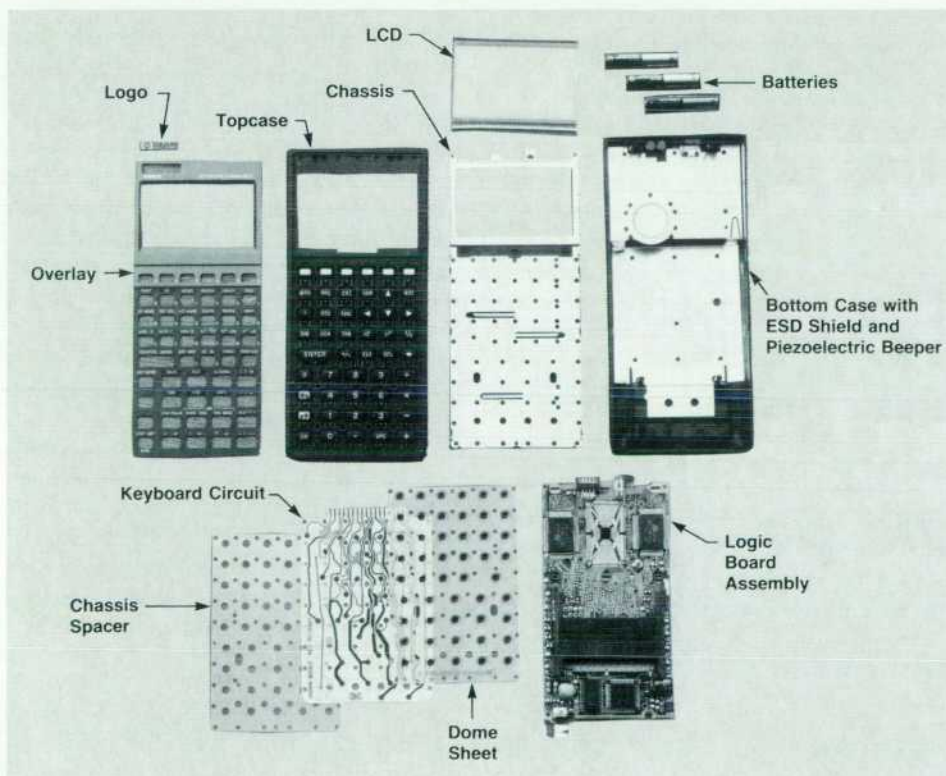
The three HP 48SX sub-assemblies are the topcase, the printed circuit assembly, and the bottom case. They are built from 24 mechanical parts and various ICs, discrete components, and surface mount devices.
